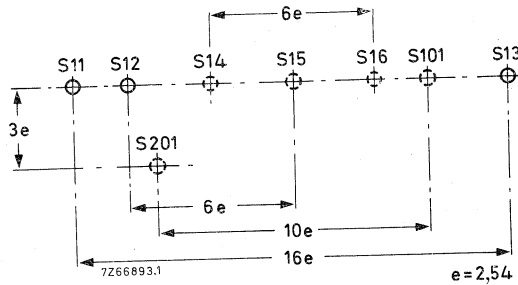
Hole pattern of the printed-wiring board for a single potentiometer (viewed on component side).
